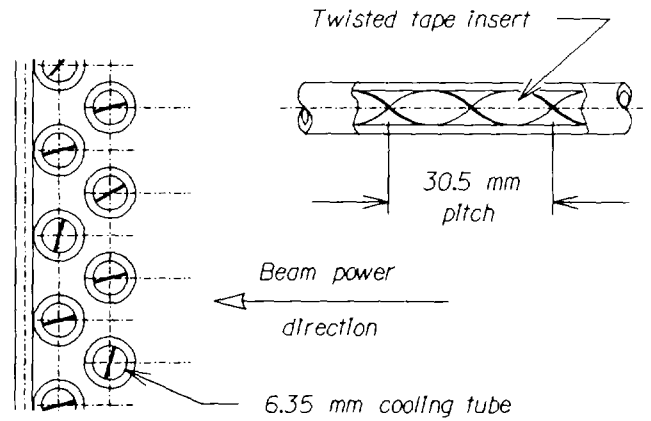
Typical cross-section of RFQ1-1250's beam stop.
